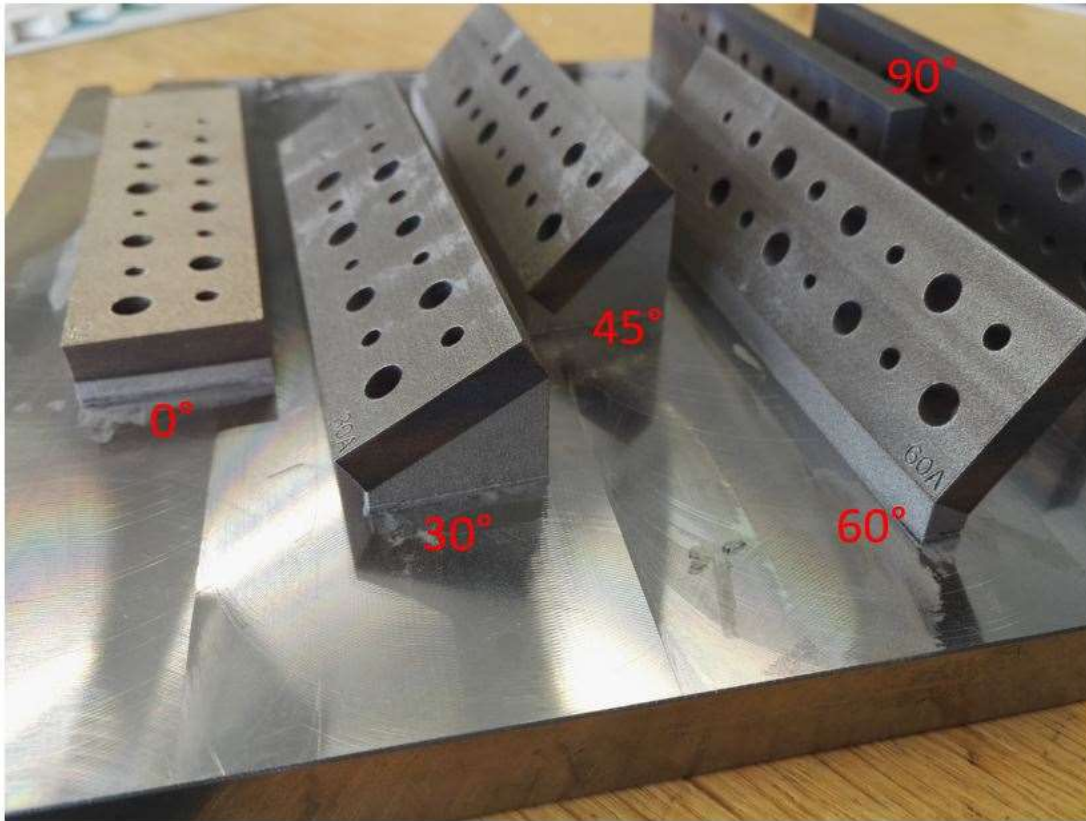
Maraging steel, as-built, parts placed 5° to recoater
